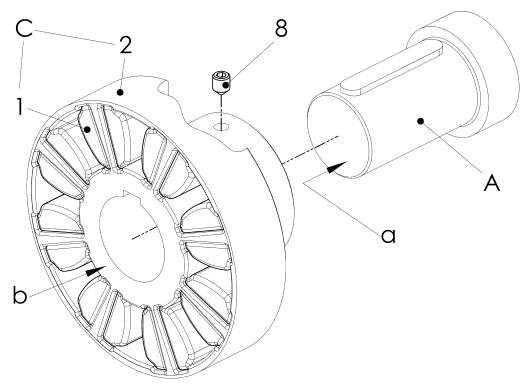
Mounting the outer part (2) with cylindrical bore and keyway
